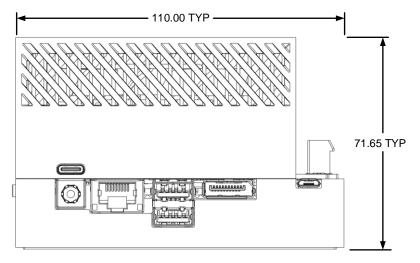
and Figure 5-4 show the mechanical dimensions for the carrier board. The weight of the DevKit is 872.5 grams.
